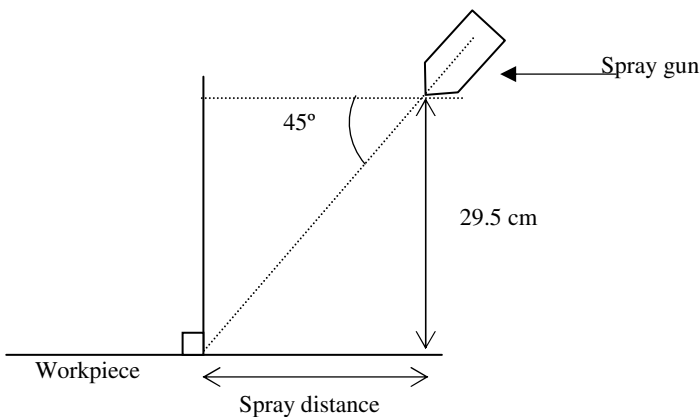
Positions and angle of spray gun respecting to the workpiece surface
